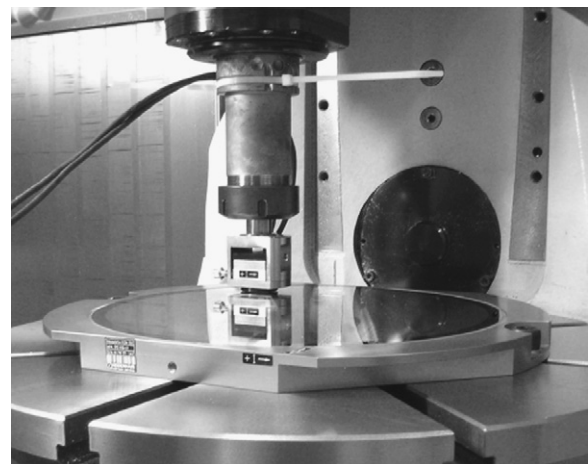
Grid plate encoder for dynamic, two-dimensional tool trajectory measurements.
